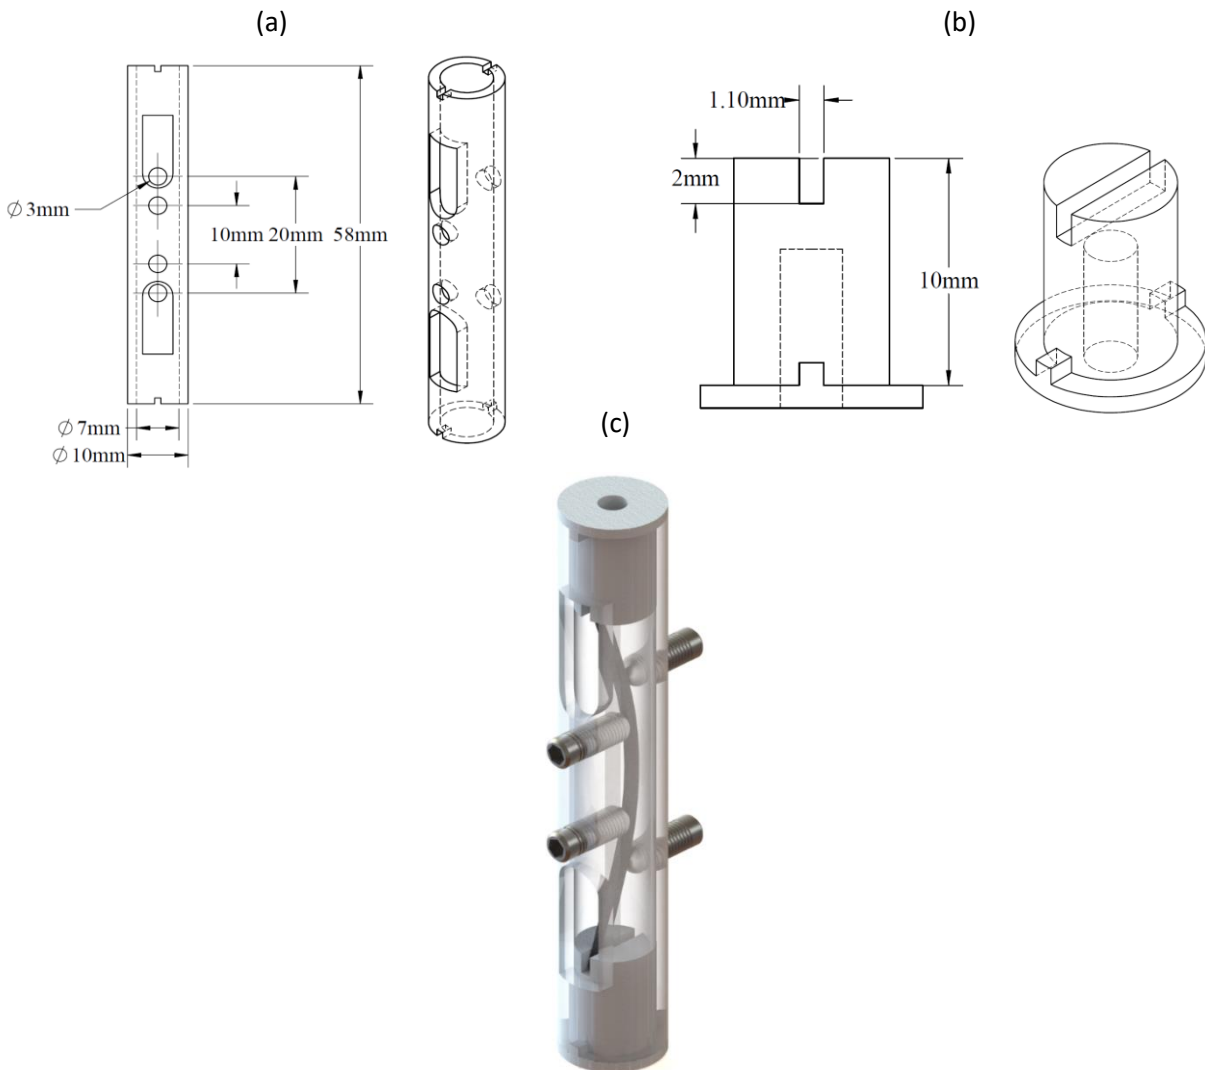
(a) Reaction tube with relevant dimensions, (b) wedges designed to maintain optimum alignment of the specimen, (c) complete assembly – showing both a bent and unbent geometry to illustrate the operating principle.
